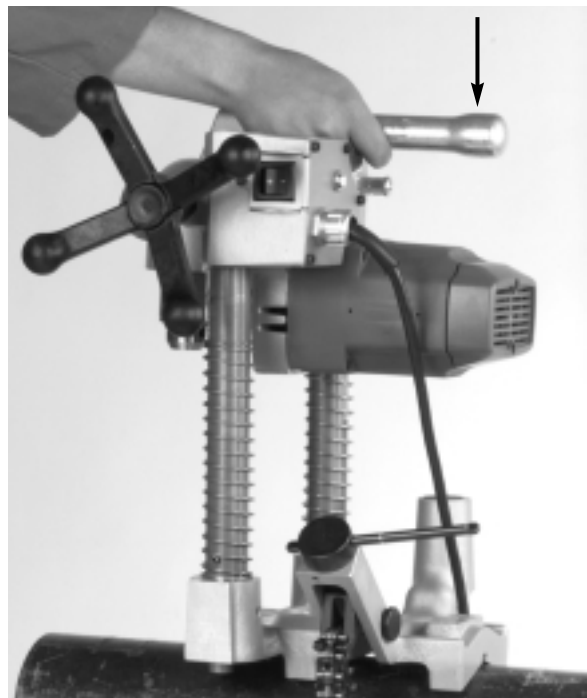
Model HC-300 Putting the Motor and Base Assembly Together
